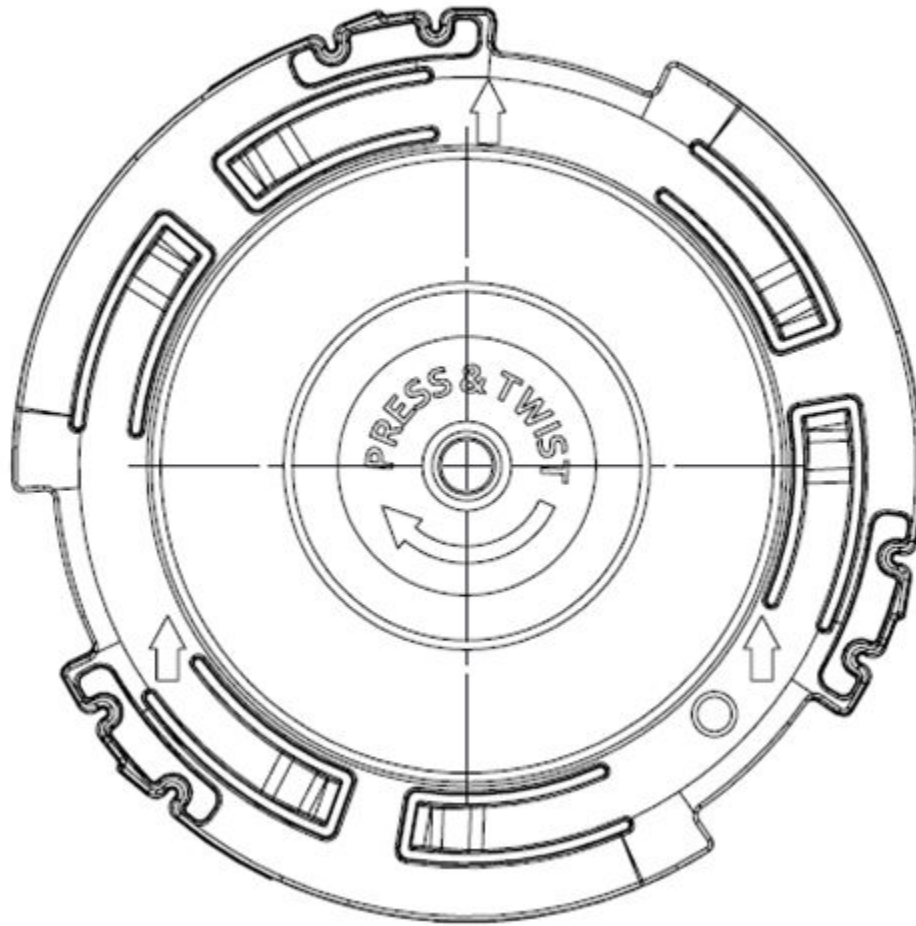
ACC-BKT-AX-JB Accessory Bracket Plastic Part
